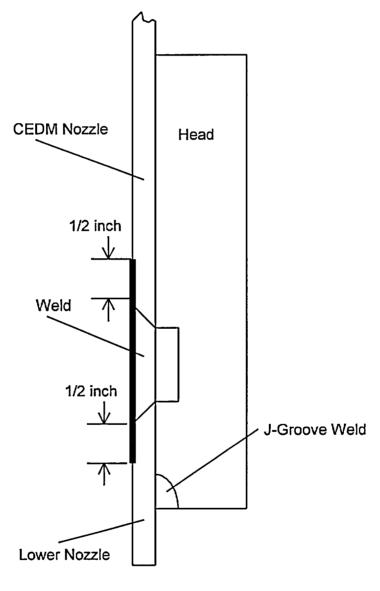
PLS1 and PSL2 CEDM Temper Bead Weld Repair, PT Coverage After Welding
